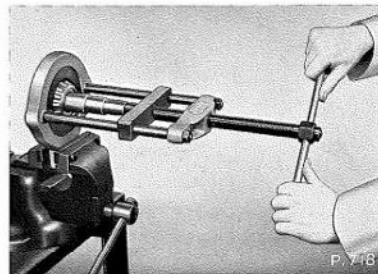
Withdrawing the inner bearing cone from the bevel pinion, using the Churchill Tool R.G.4221B and the adaptor set R.G.4221B-22
